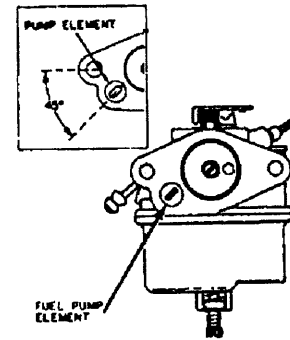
Fuel pump element (4—Fig. E2-2) should be installed at a 45° angle as shown.
